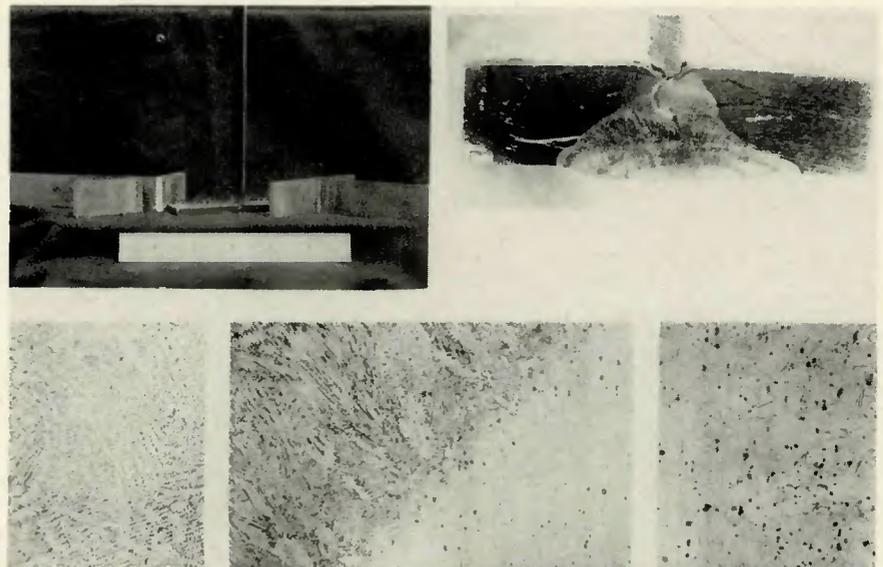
Aged plug weld T-joints before and after tensile testing. Fracture has occurred mainly through HAZ as seen in cross section. Microstructures of weld zone, weld/base metal interface and base metal are shown from left to right (X100, reduced 52%)
